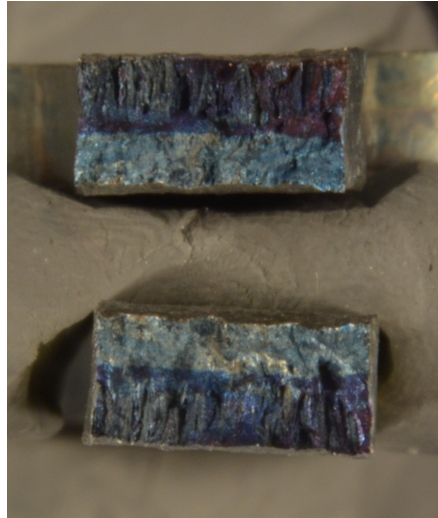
Fracture surface of Inconel 625 (Clad on 4330) specimen - Tensile test conducted at 820°C. Illustration of the presence of heat tint.
